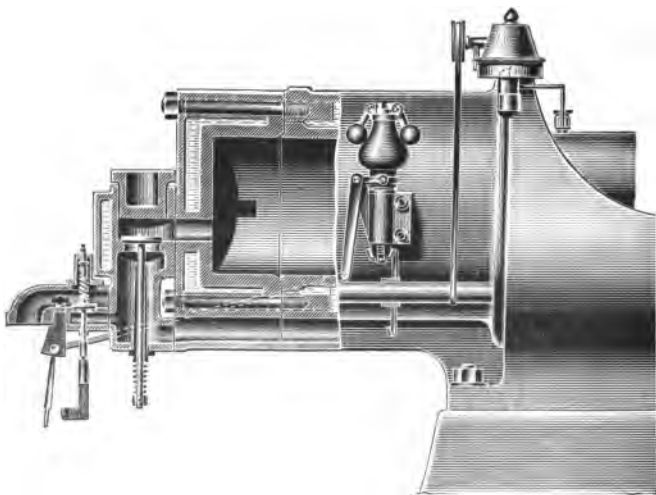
“Stockport” Gas Engine—Sectional Elevation.
